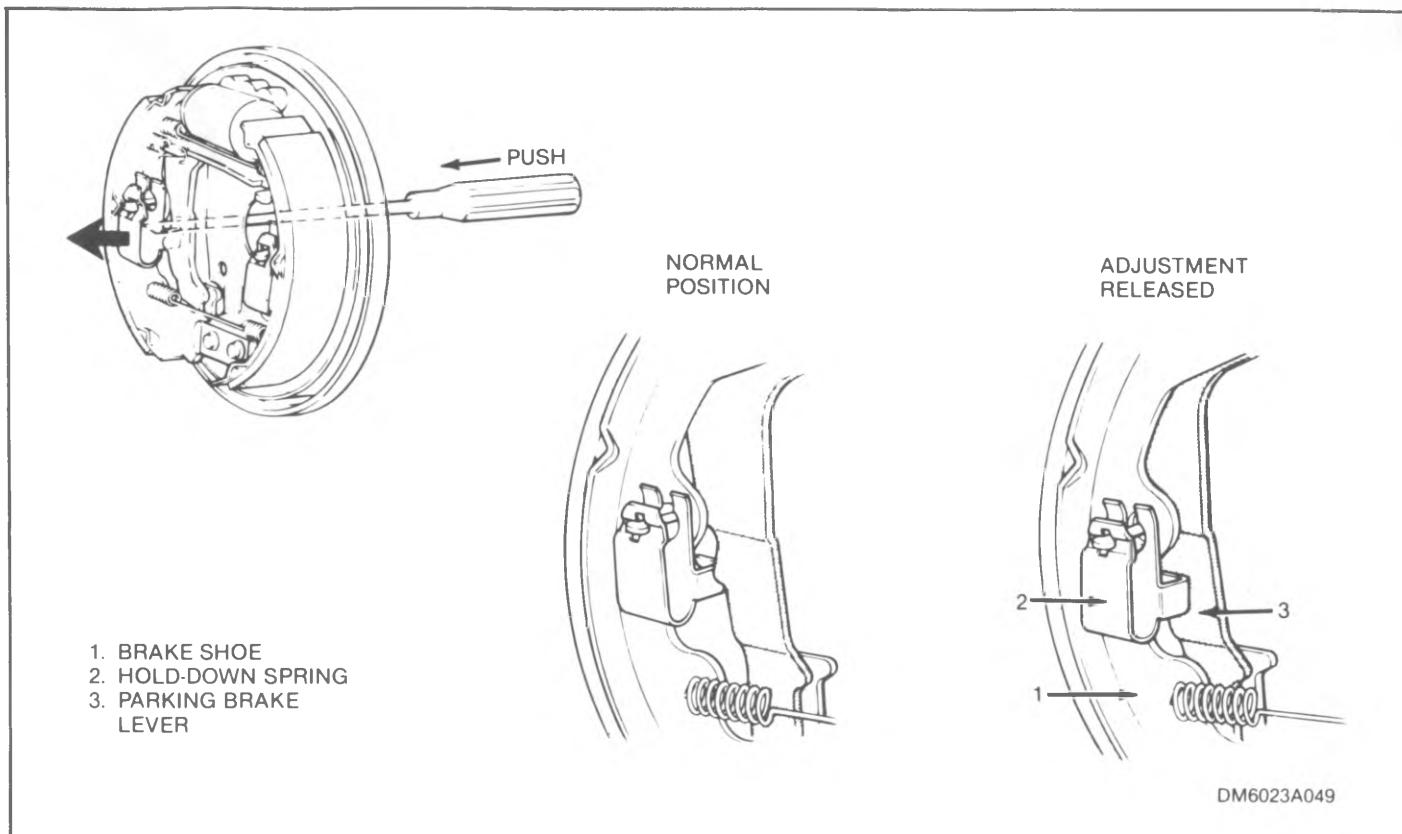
Releasing Brake Adjustment 1985-86 Sprint Leading-Trailing Shoe Drum Brake
